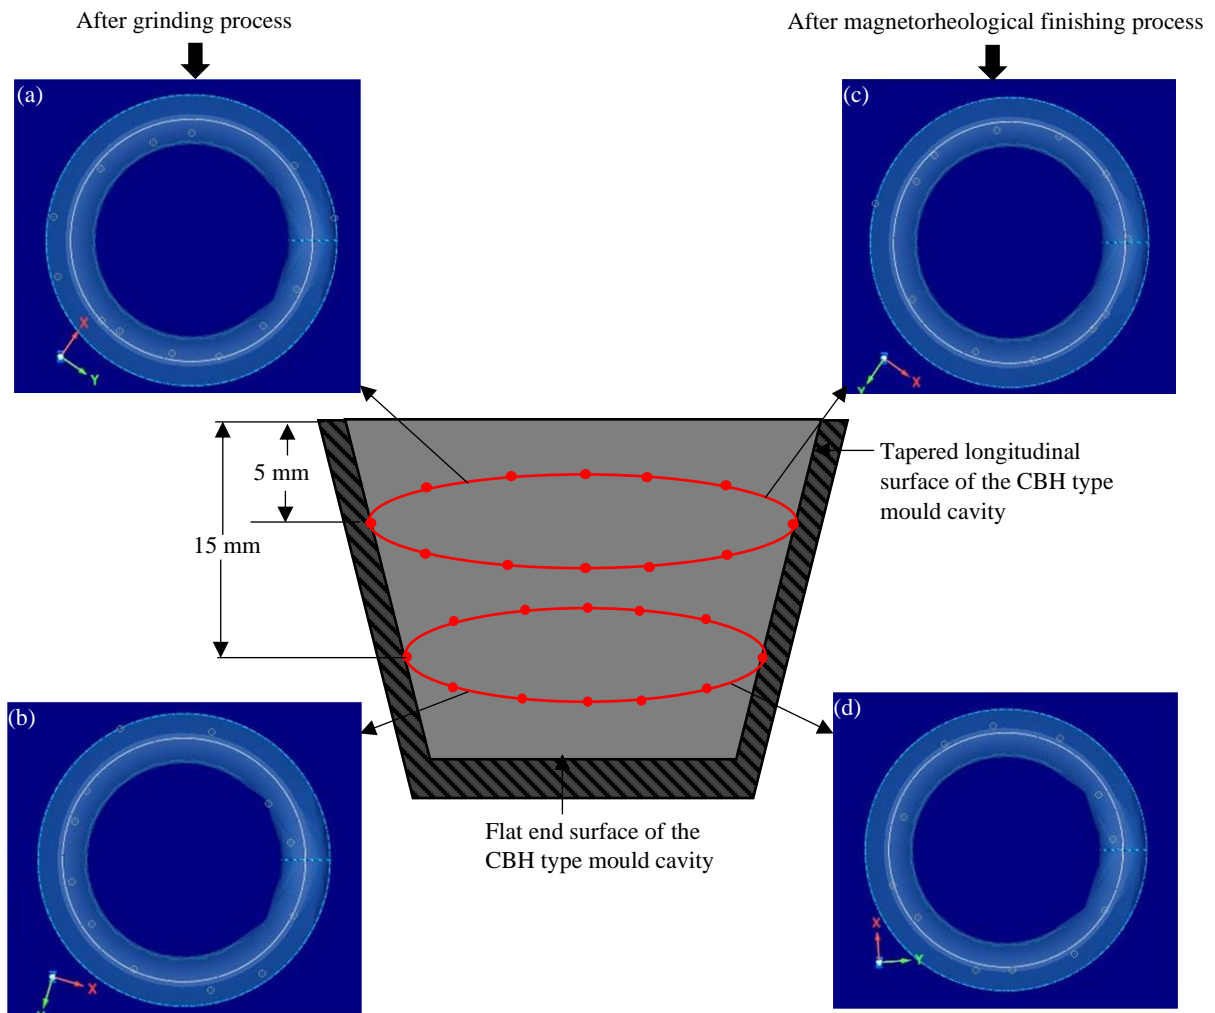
Circularity test over initial surface at (a) 5 mm, (b) 15 mm and the final MR finished surface at (c) 5 mm and (d) 15 mm over the tapered longitudinal surface of the typical mould cavity for the light cover.
